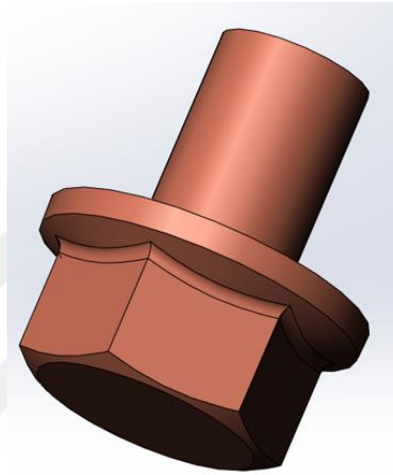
Carbide Alloyed and Radius Formed Copper Electrode CAD Model
